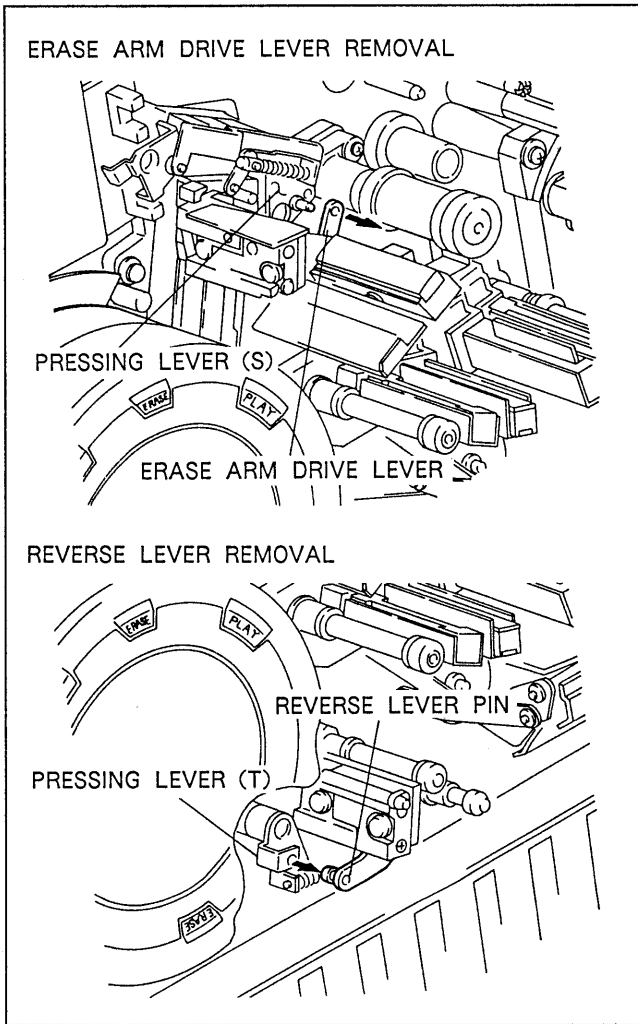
Removal of Erase Arm Drive Lever/Reverse Lever
